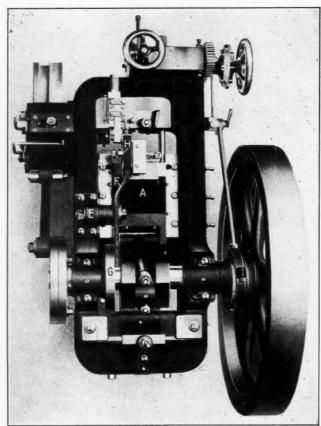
Plan View of Blake & Johnson Double-stroke Solid-die Header
